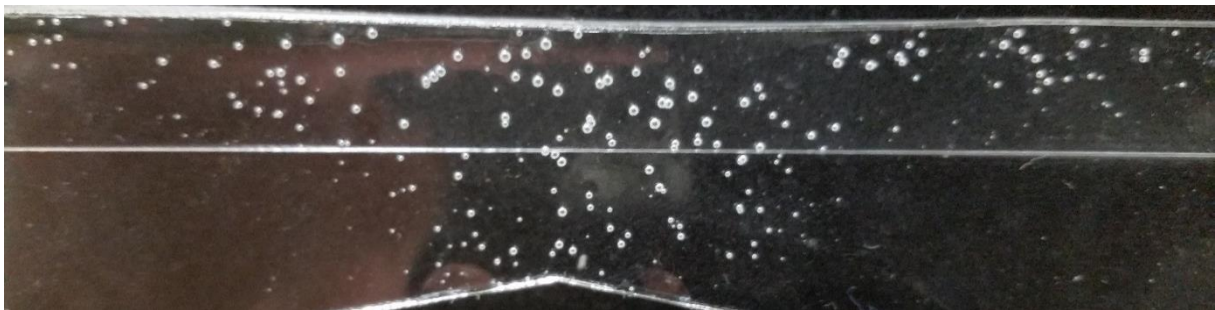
Boiled acrylic that occurred during vacuum forming.
